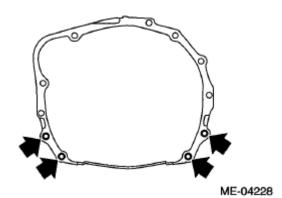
Locating Transmission Bolts (CVT Model) Courtesy of SUBARU OF AMERICA, INC.
